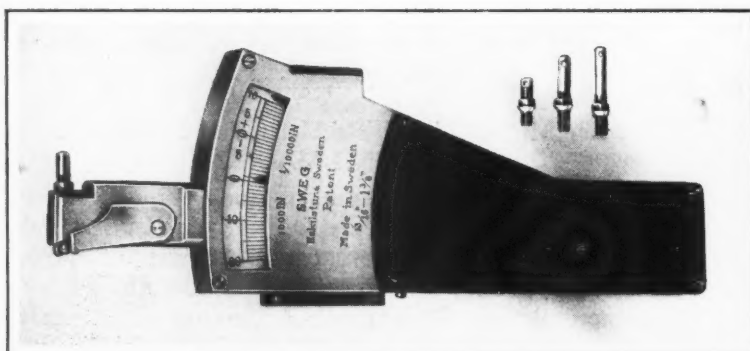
Internal Indicator Gage Placed on the Market by the Swedish Gage Co. of America
